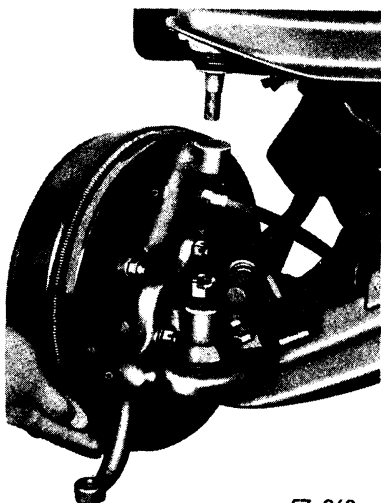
Checking Steering Axis Inclination (Gauge C-3409)
